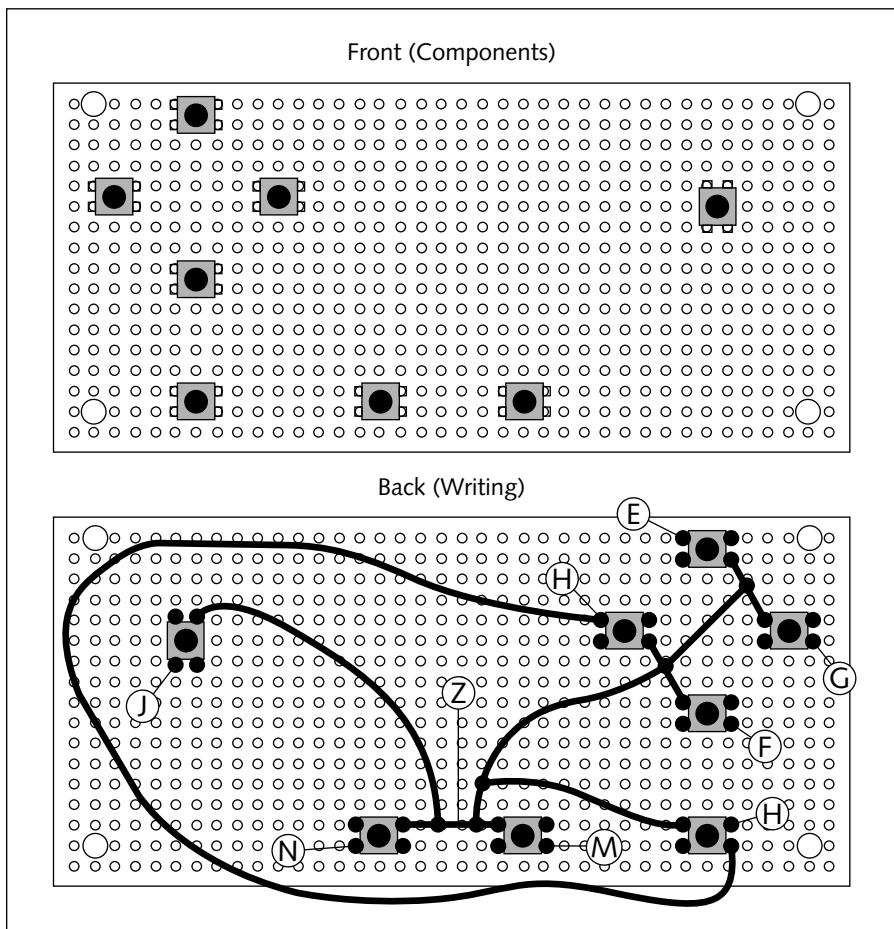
Placement of components (front) and wiring (back) on the PC control board.
